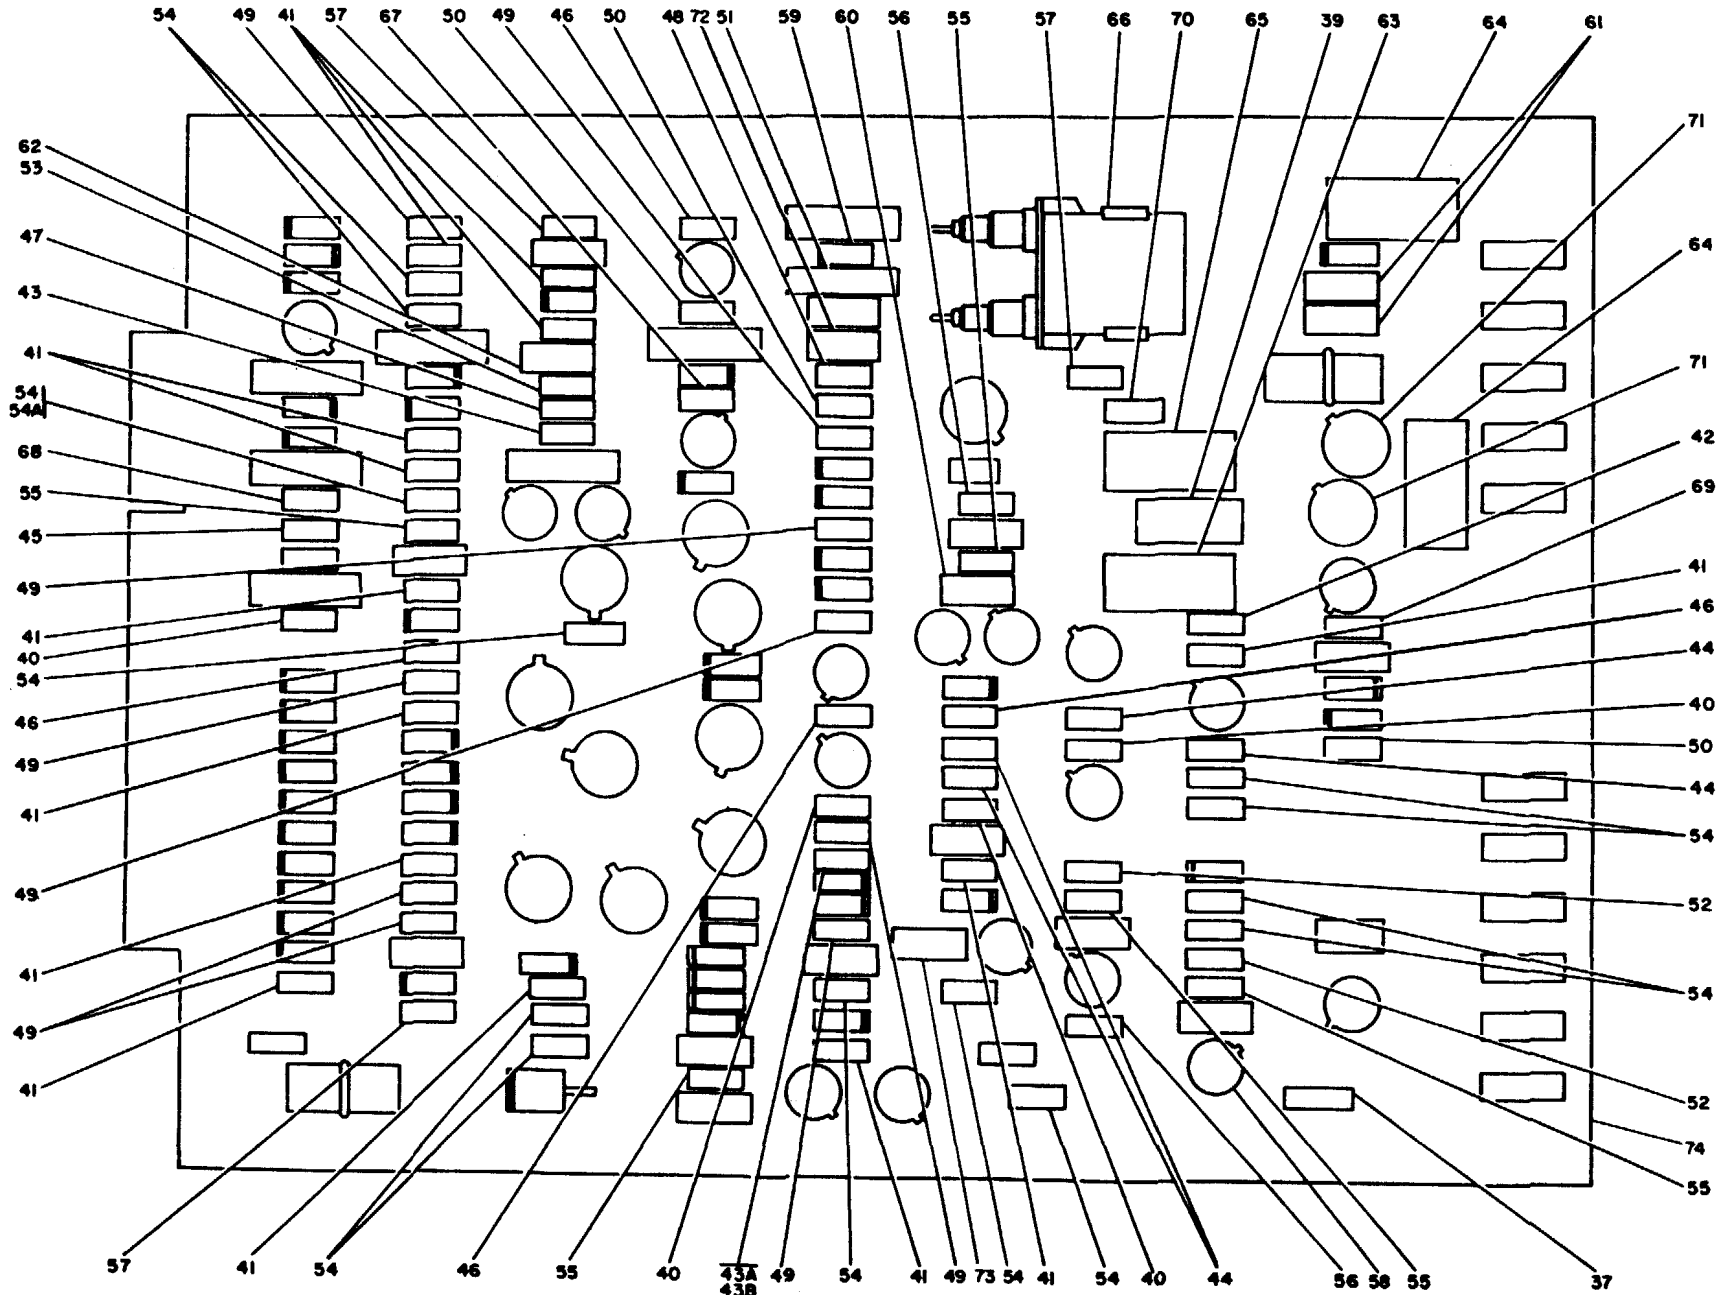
Circuit Card Assembly, Logic No. 3 (Sheet 2 of 2)
